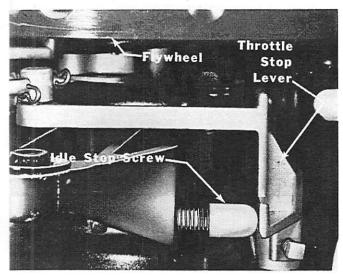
Throttle Stop Lever Touching Idle Stop Screw
